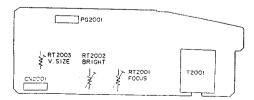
Electrical Adjustment (EVF) Circuit Board (Parts Side)
